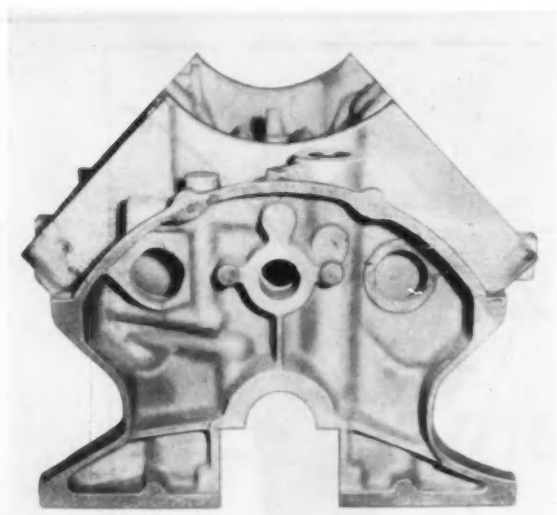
Cylinder block rear face has pockets on either side of the rear flange for weight reduction.
